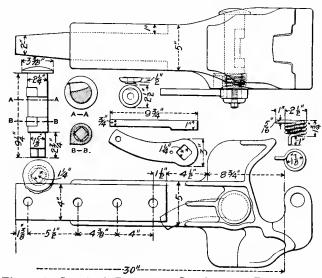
Standard Passenger Coupler and Parts. Standard Coupler Company.
